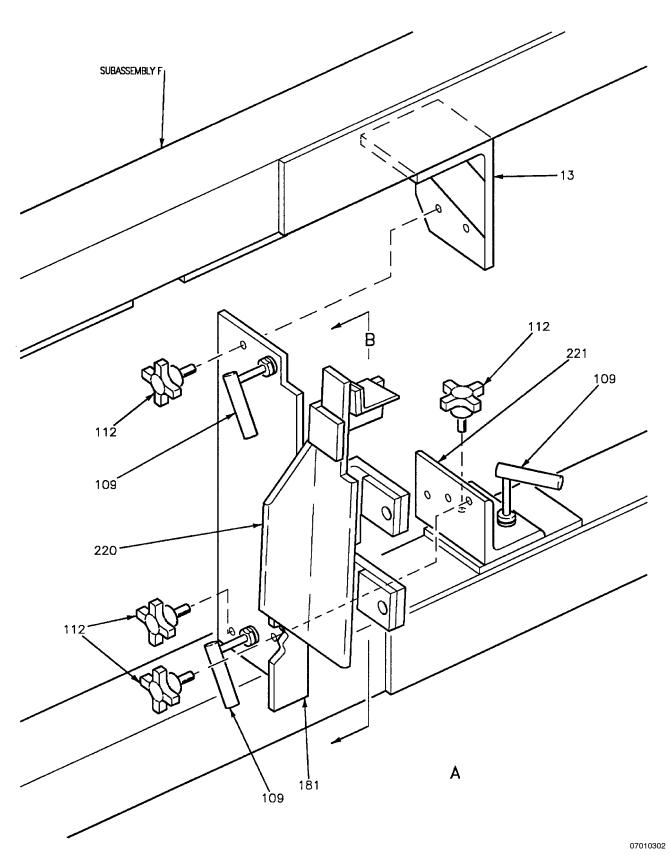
Outboard Drive Arm, 74A180740 (Sheet 2)
